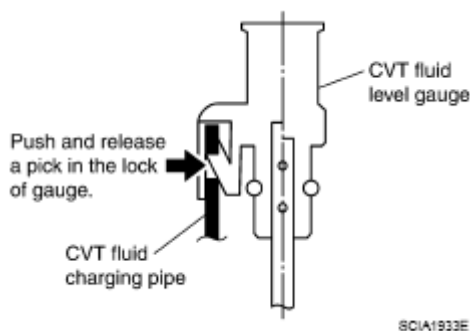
Identifying CVT Fluid Level Gauge And CVT Fluid Charging Pipe
